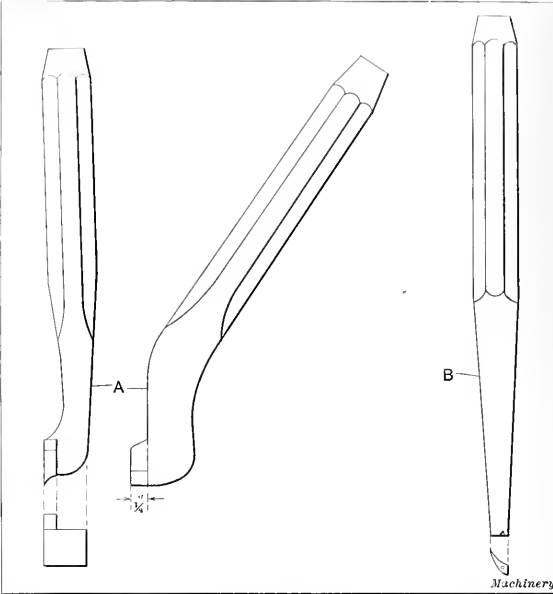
Tools used for expanding the Calking Strips Sidewise and Endwise
